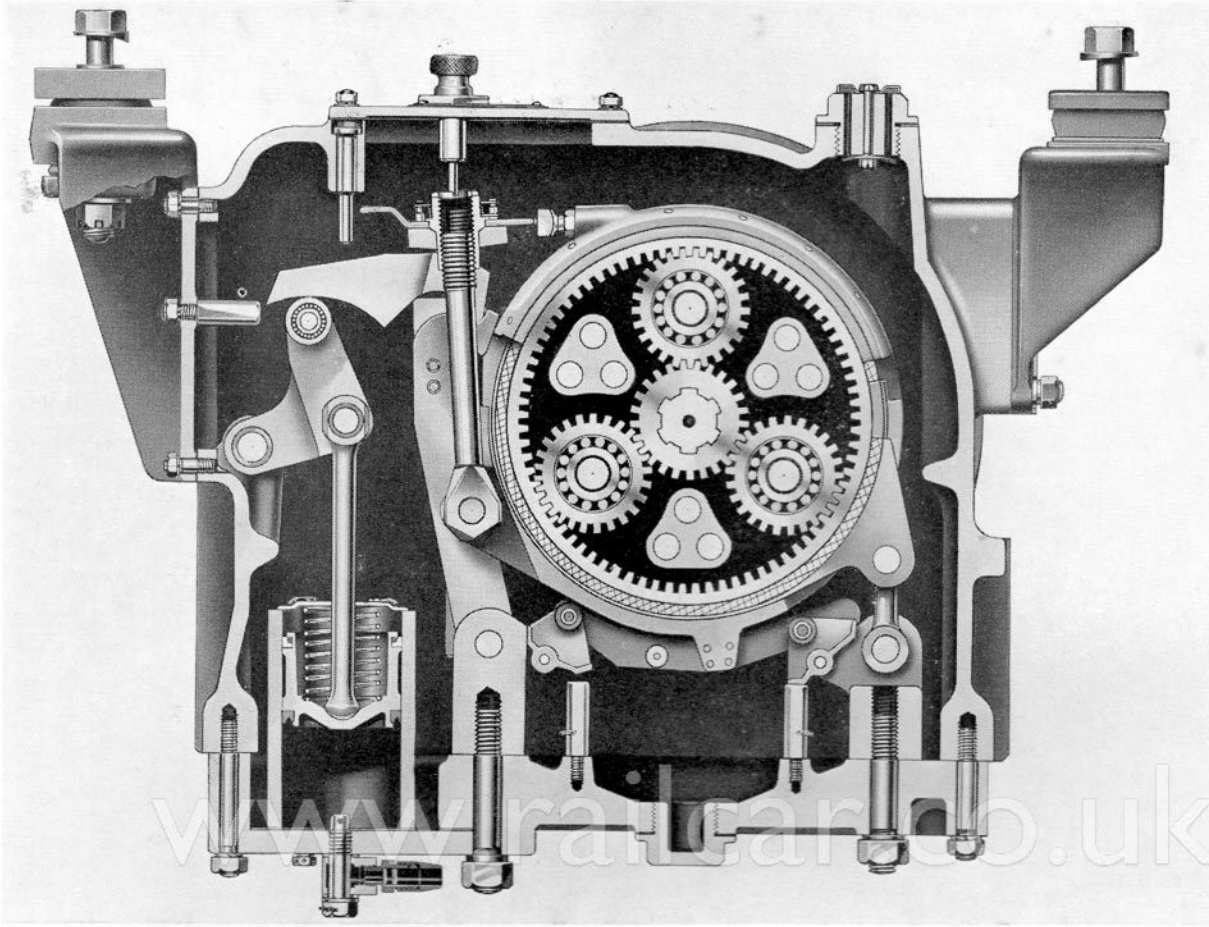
Section through the 1st Speed Brake Band (Brake On)
